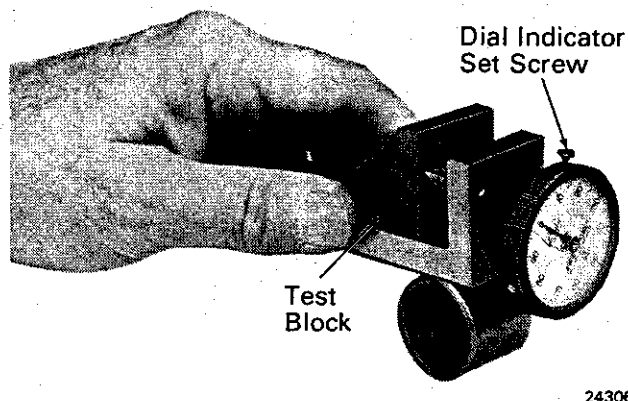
Checking Head Retainer Wear Step Gauge Calibration
